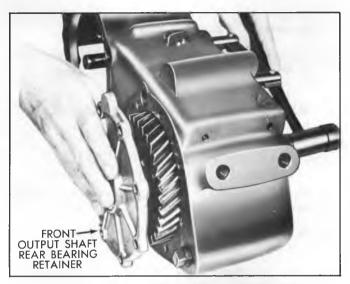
C--Removing Front Output Shaft Rear Bearing Retainer
